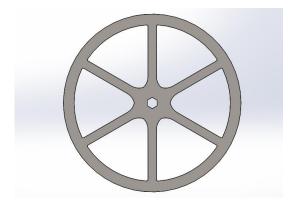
Improved wheel design - from Mark 3 (side view).
